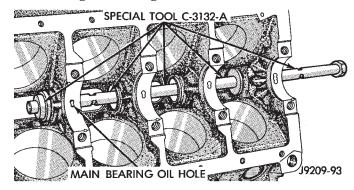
Camshaft Bearings Removal/Installation with Tool C-3132-A
